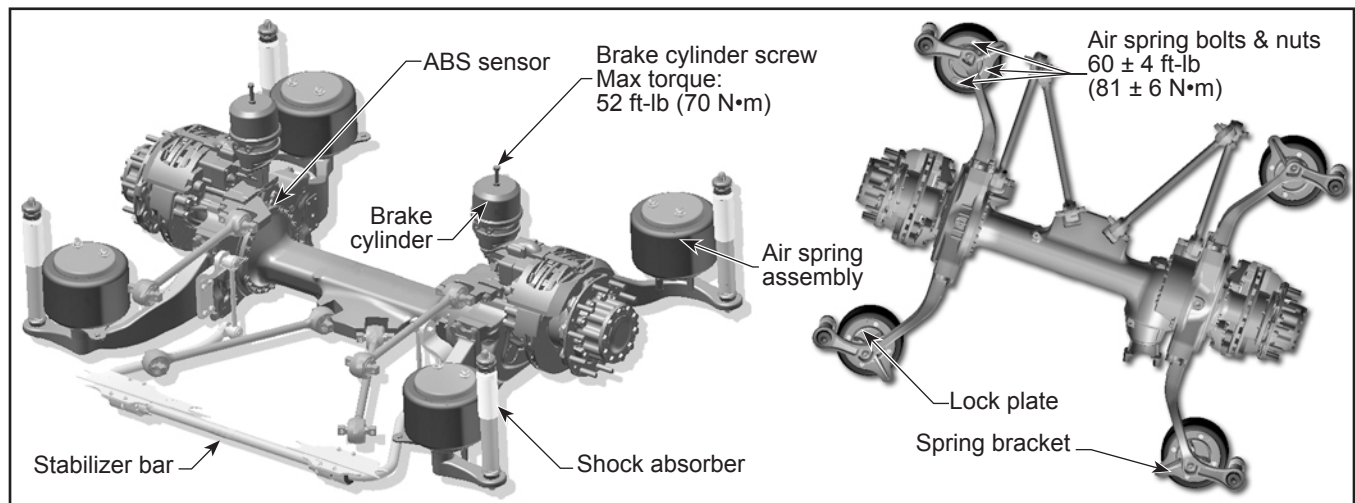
Rear Axle AV 132 (ZF) Assembly
